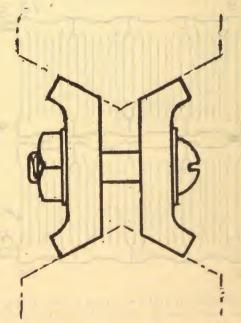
Assembled in twelve sections in three tiers. Using adjustable spacing saddle.
